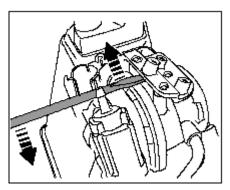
Levering out leakage diagnosis pump Courtesy of PORSCHE OF NORTH AMERICA, INC.
